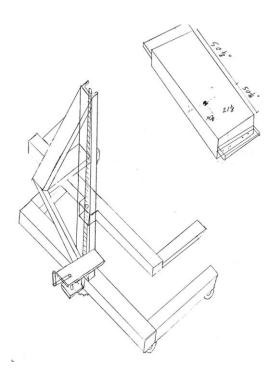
Screw jack with legs extended around lower cabinet and forks that sliding into D-box lift point mounted on the machine top
